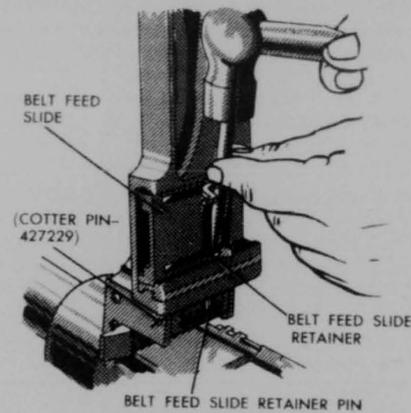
Removing Belt Feed Slide Retainer Pin.
